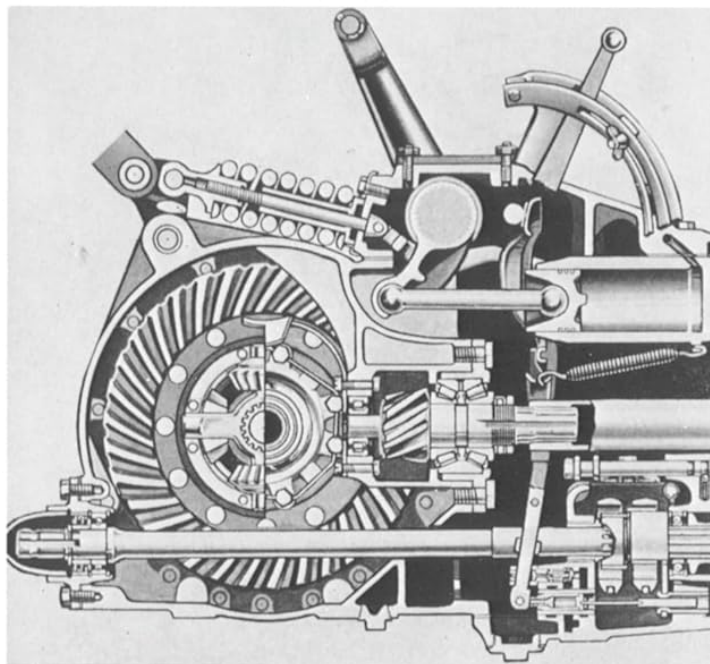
Model TO30 differential, main drive bevel ring gear and pinion, hydraulic lift pump, lift (rock shaft) cover, and power take-off shaft assemblies are located in the rear axle center housing—right sectional view. TE20 and TO20 are similar.
